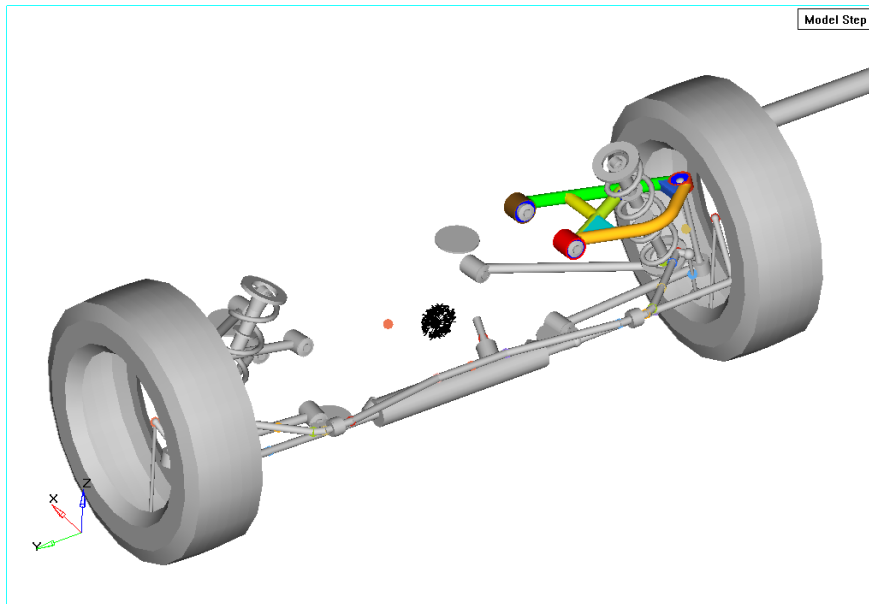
multi rigid body model that can run with Motion Solve, Adams and Abaqus; with the CAD shape of the components also packaging check can be performed.
